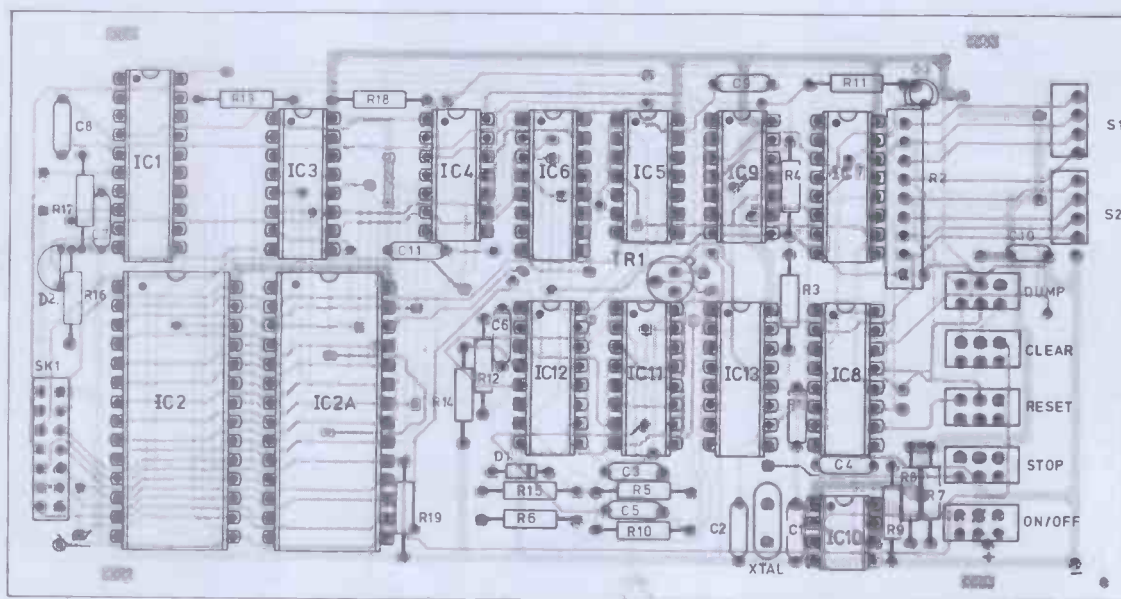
Double sided p.c.b. of the Data Logger. See photos for positioning of D3. All pin throughs should be soldered in first. Make sure that no tracks are bridged with solder—a very fine soldering bit is required—as is a steady hand. Due to the complexity of the board no p.c.b. masters have been given here.
